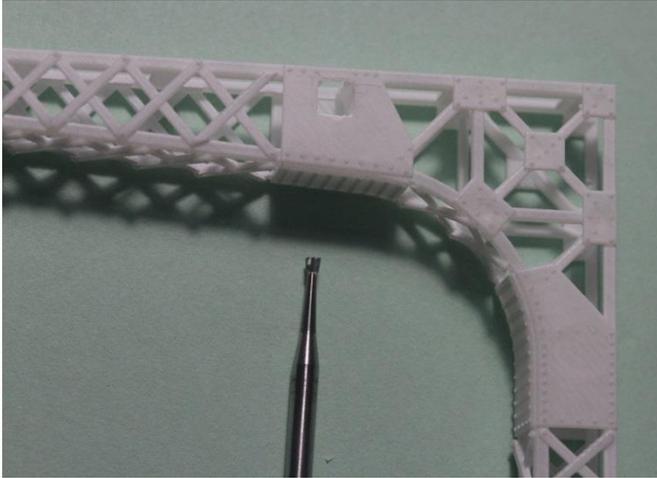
The mounting box opening has been roughed out with an inverted cone burr.
